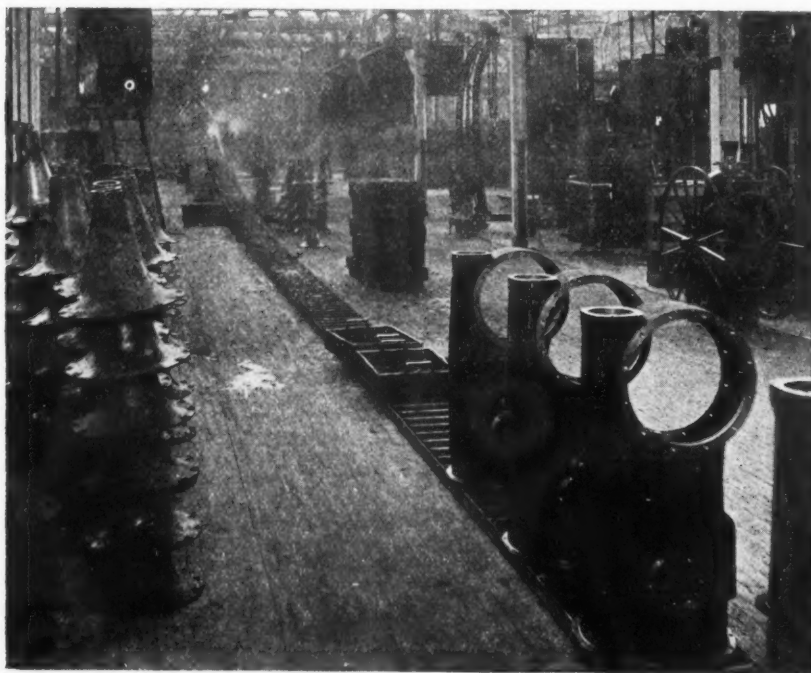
Looking backward toward the washing machine, showing the incline down which the parts slide to the beginning of the transmission assembly track
